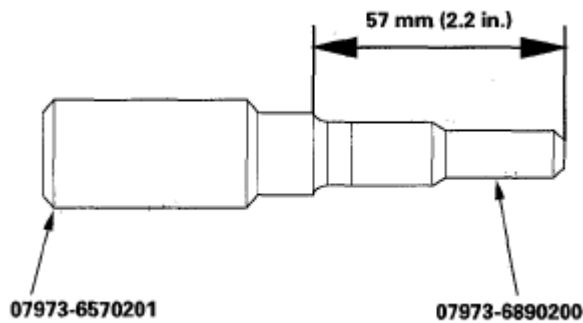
Identifying Length Of Piston Pin Driver Head & Shaft To 57 mm (2.2 in.)
